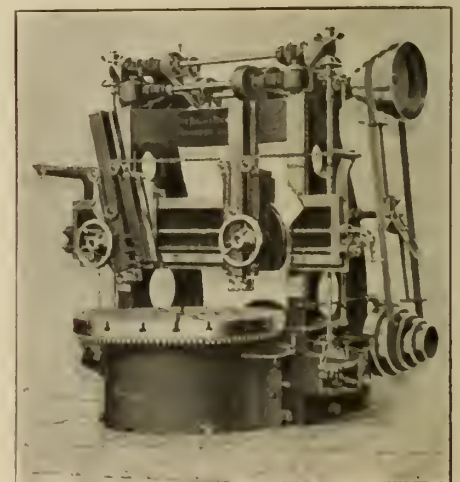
Sixty-inch Mill, Showing Brake, Belt, Shifter, Etc.
